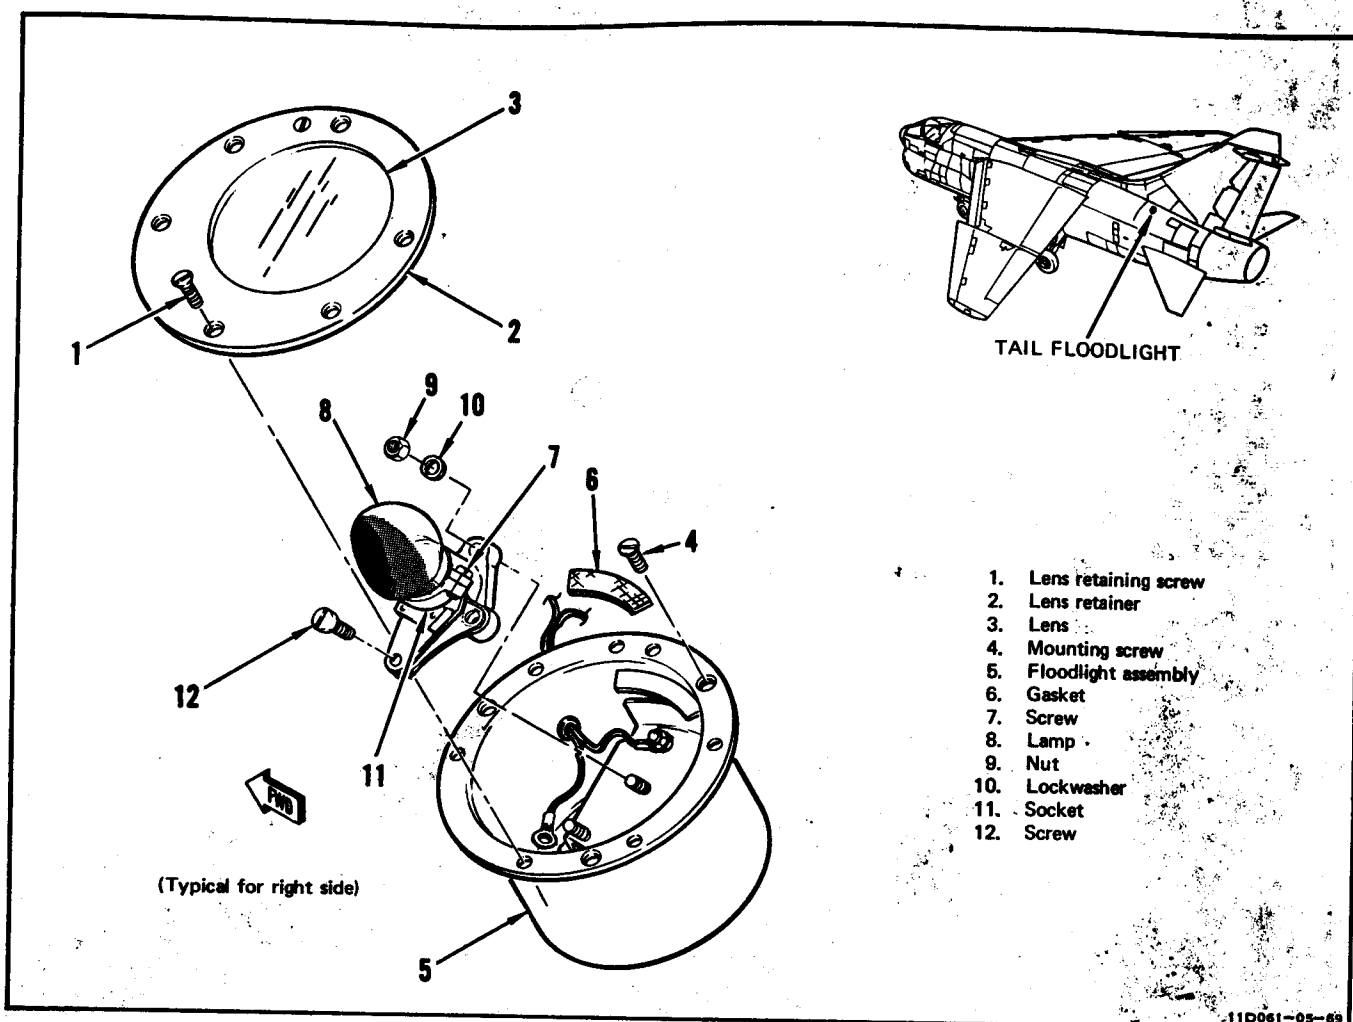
Tail Floodlight Assembly Removal and Installation
